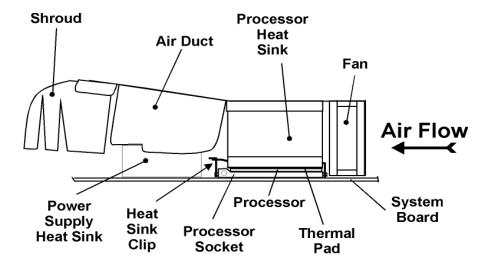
The Processor Heat Sink and Air Duct (side view)
